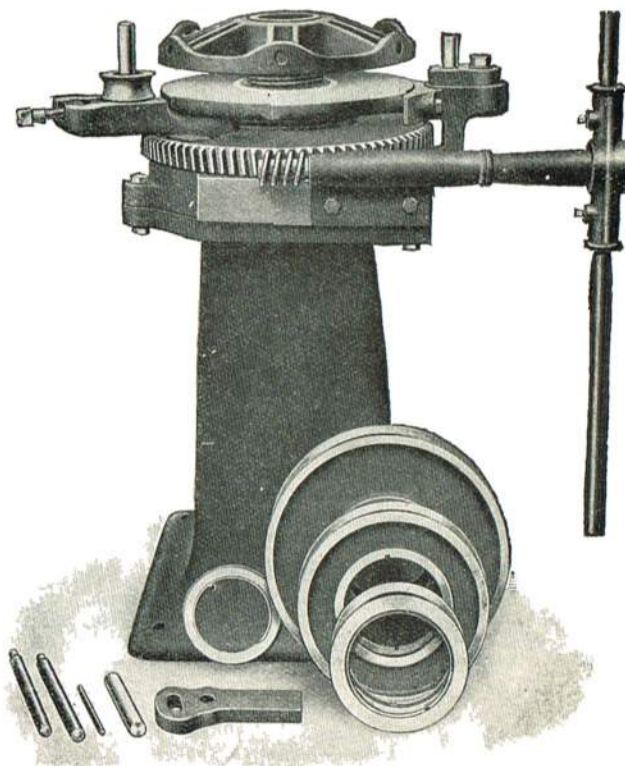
Illustration of No. 2a and No. 3 Pipe Bending Machine.
